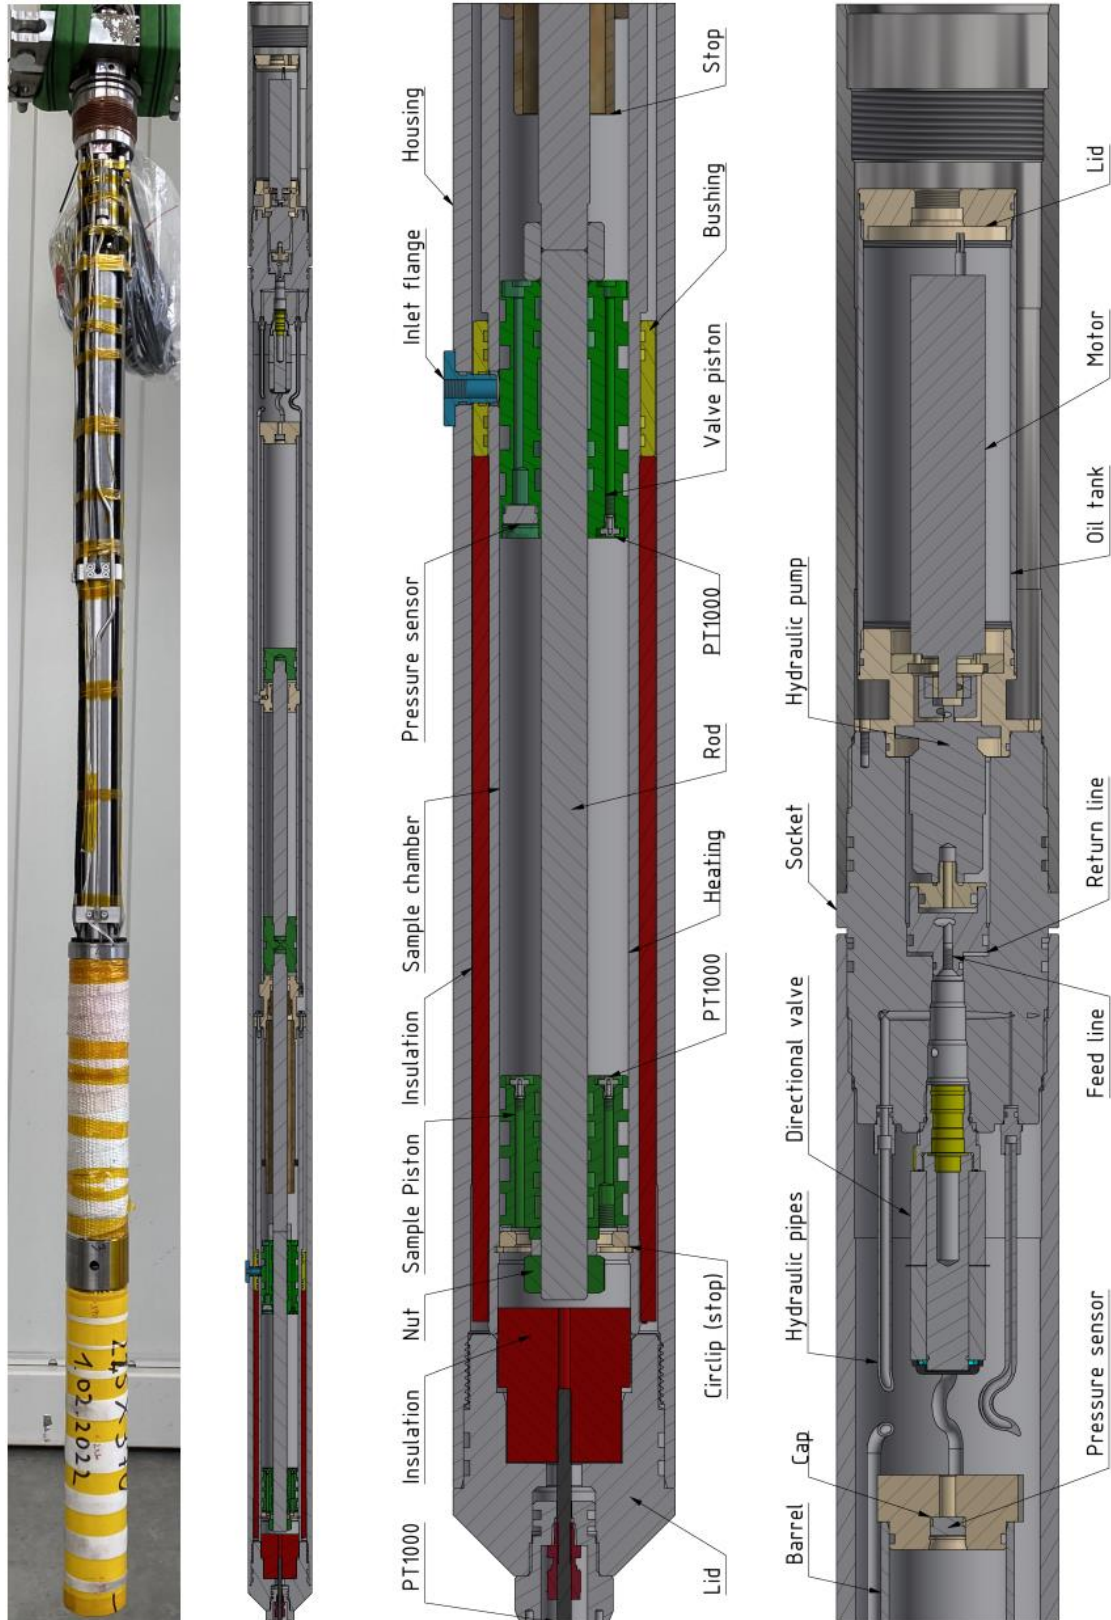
Left to right: photo of demonstrator inliSAMP used in test rig, CAD model borehole probe inliSAMP, enlargement: sample chamber, hydraulic power pack.
